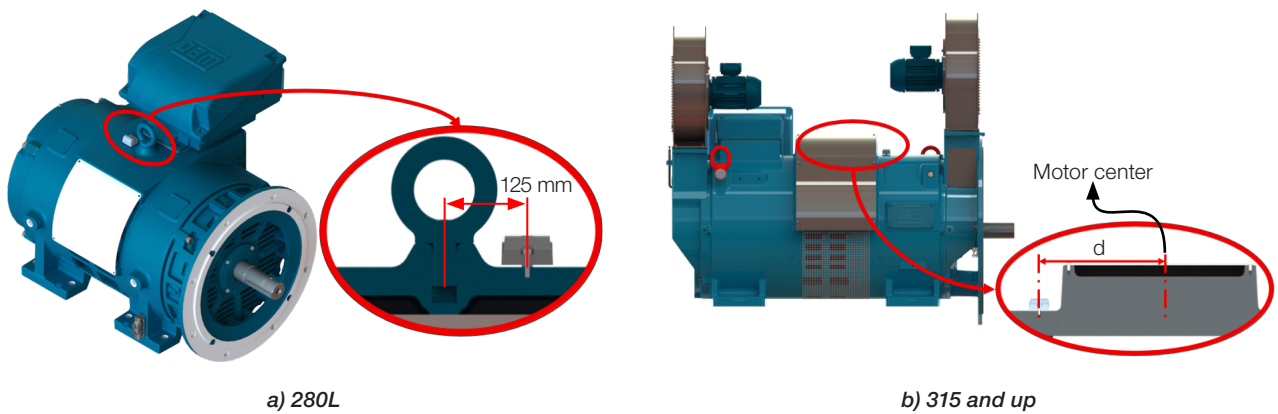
Place to install the WEG Motor Scan on W40 motors, frames 280L and up
